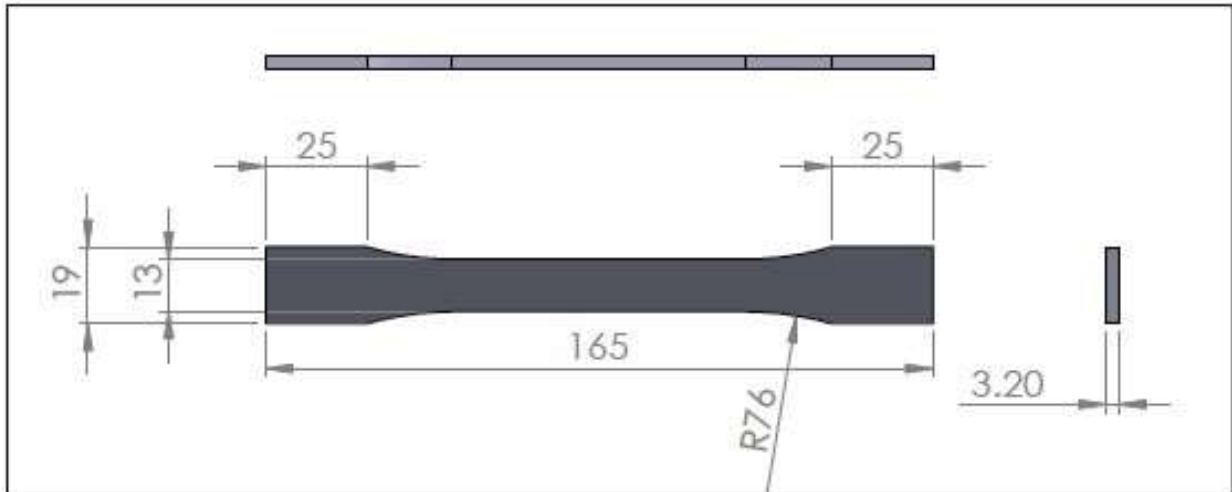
ASTM Standard D-3039 Tensile Test Specimen.
